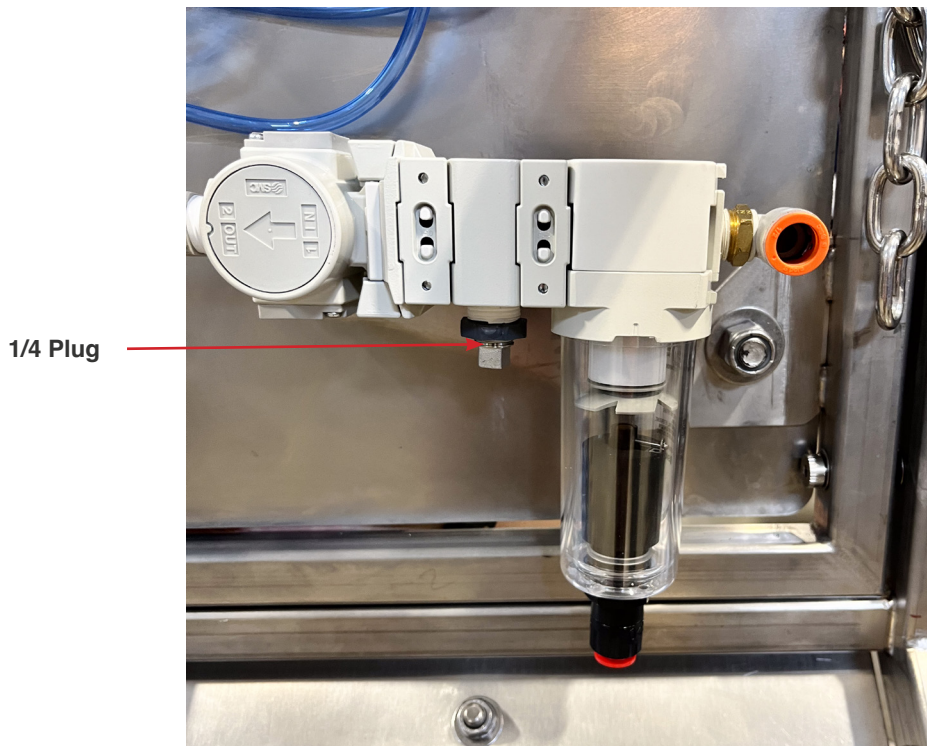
1 - 1/4" plug on Main Air Regulator
